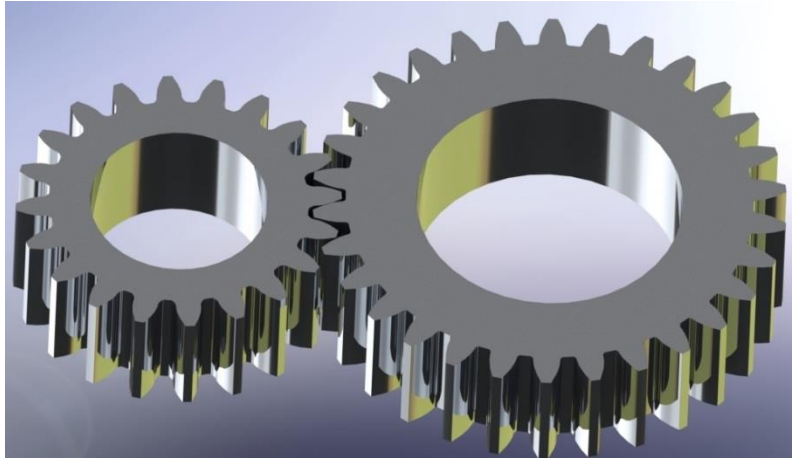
3-dimensional CAD model of the designed gear drive by SolidWorks software
